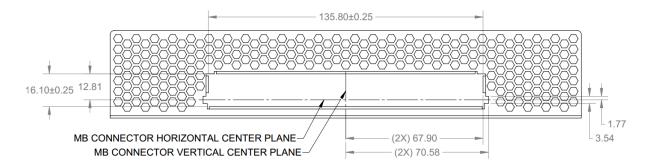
Large Form Factor Baseboard Chassis CTF Dimensions (Rear View)
